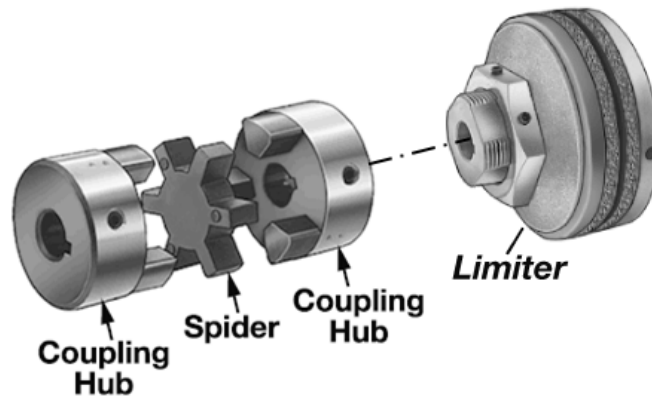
Coupling Assembly Applies Resistance Beyond 90°
